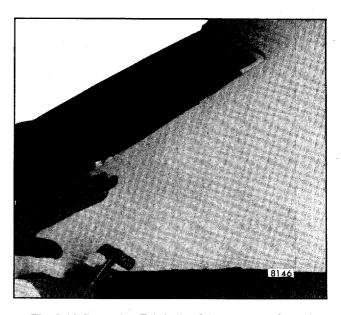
Cementing Fabric Roof Cover to Roof Panel
